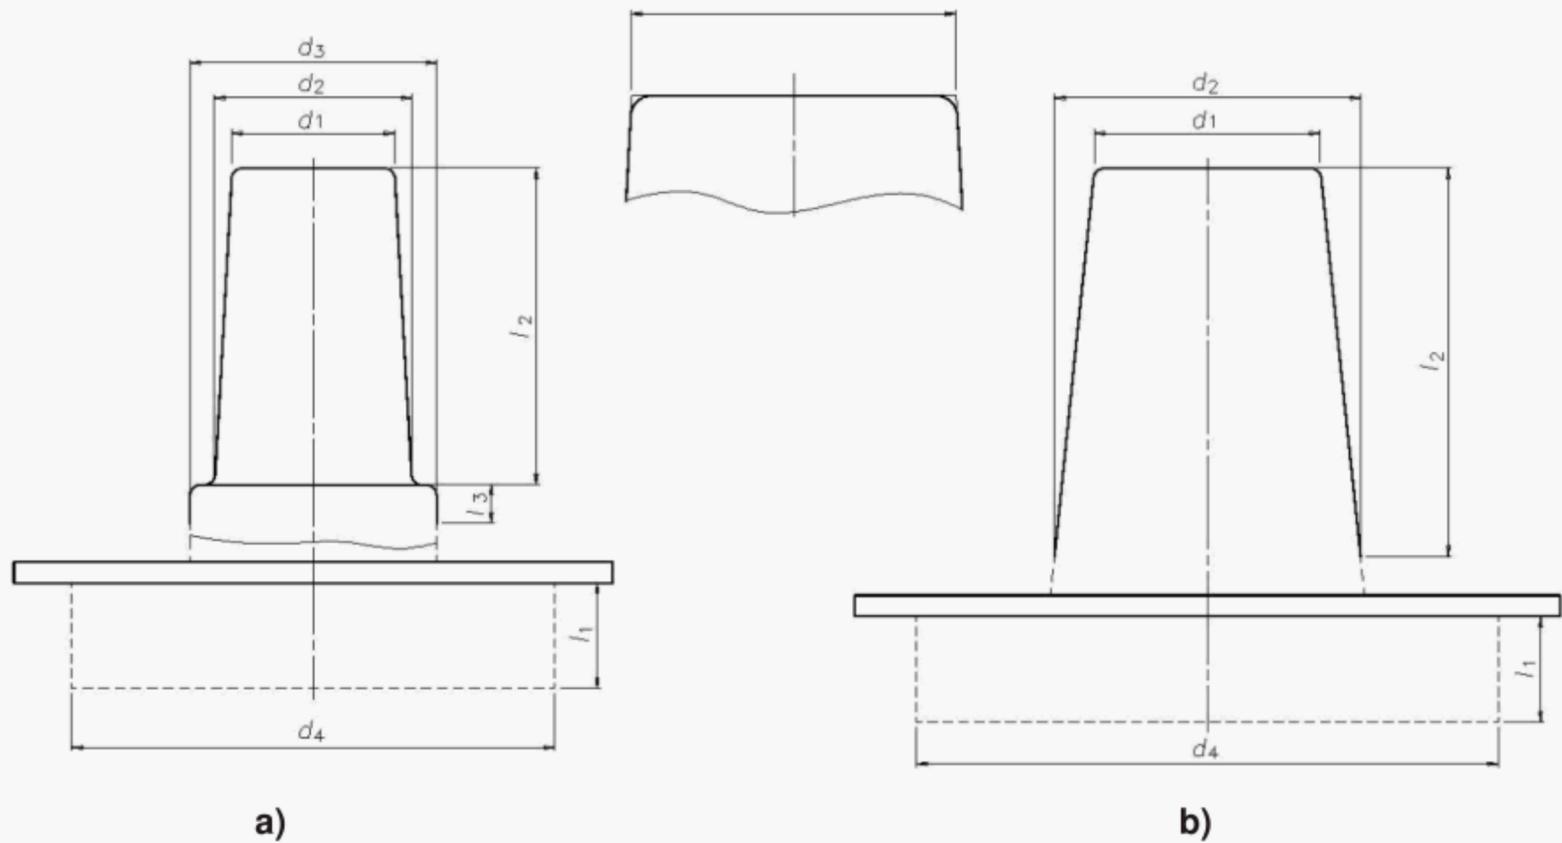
Interface dimensions of outside cone plug-in type bushings
